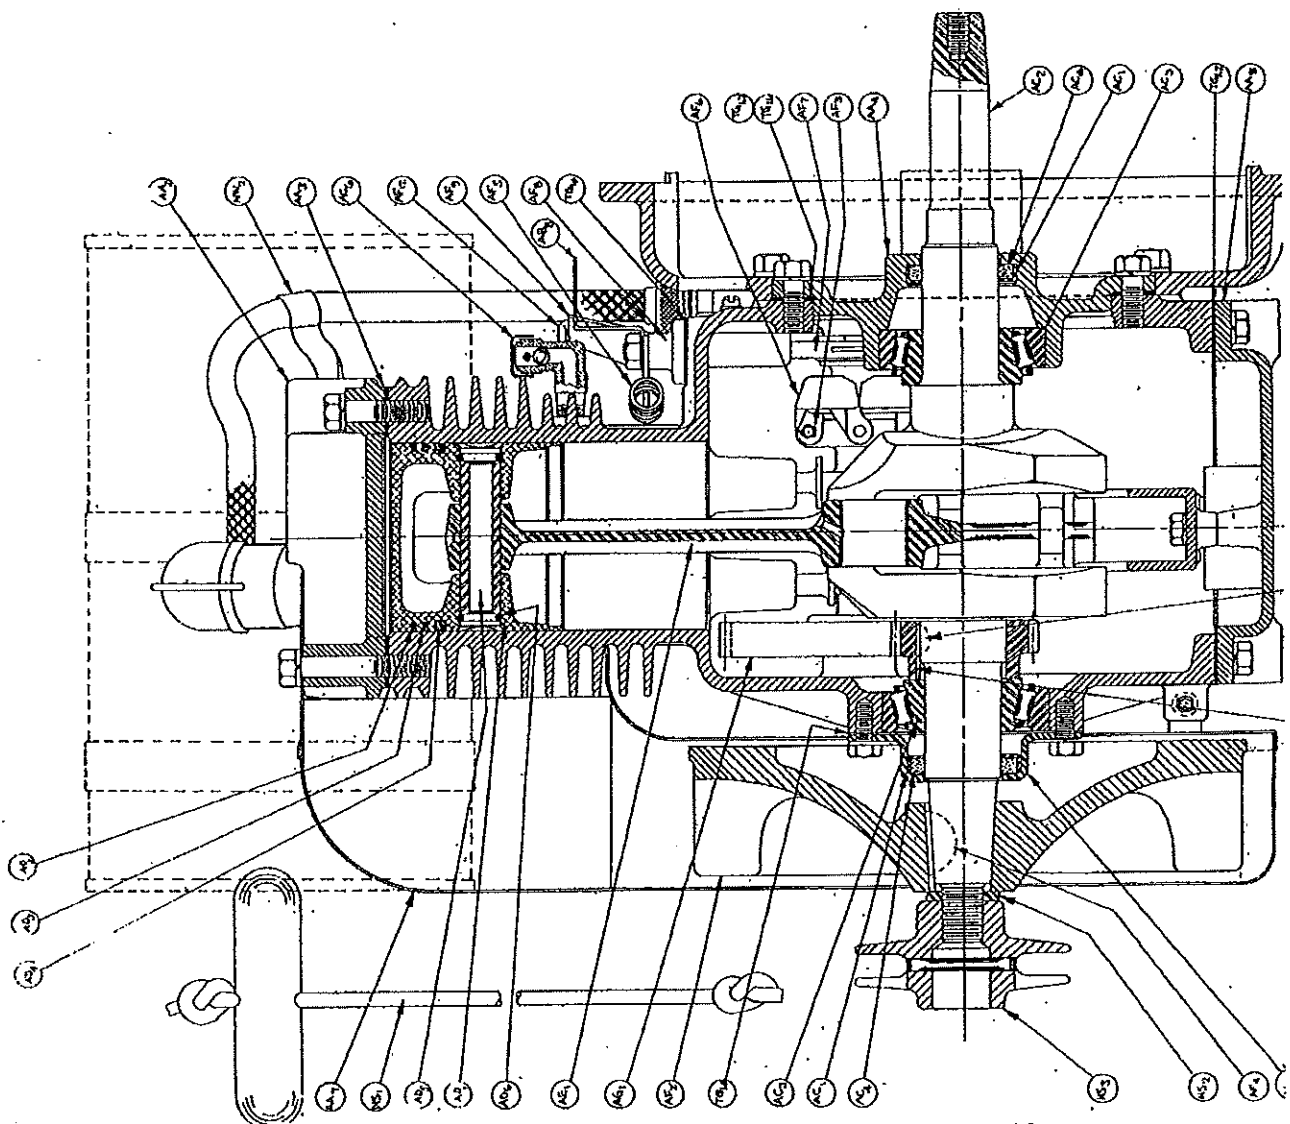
Power Unit PE-108(*) Gasoline Engine, Side Cutaway View.
